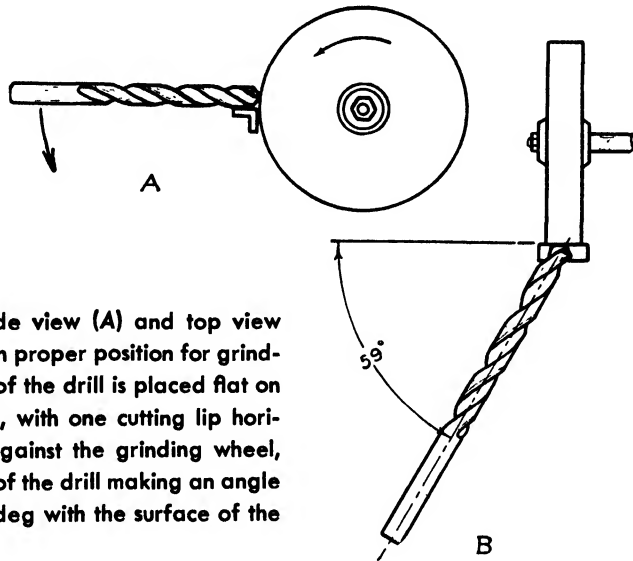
Side view (A) and top view (B) of a drill in proper position for grinding. The end of the drill is placed flat on the work rest, with one cutting lip horizontal and against the grinding wheel, with the axis of the drill making an angle of about 59 deg with the surface of the wheel.
